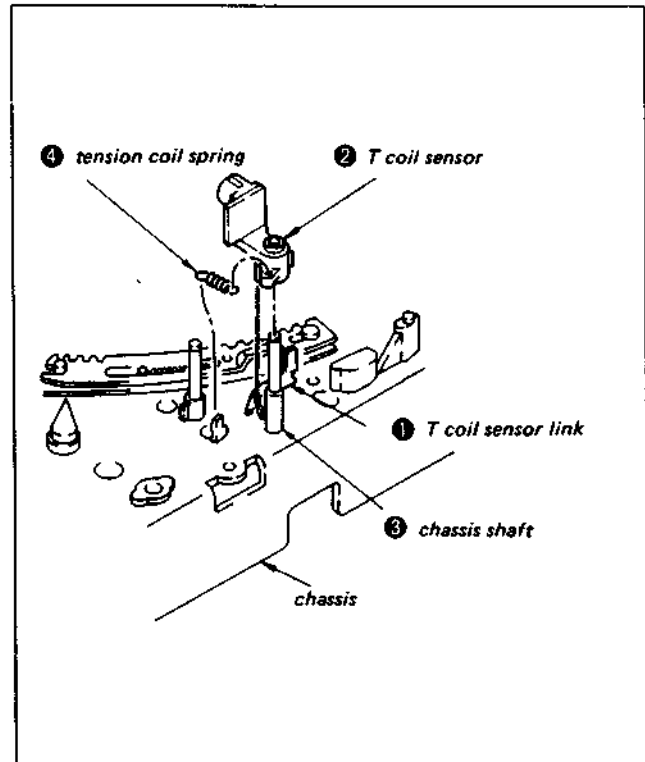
T coil sensor link and T coil sensor mounting.
